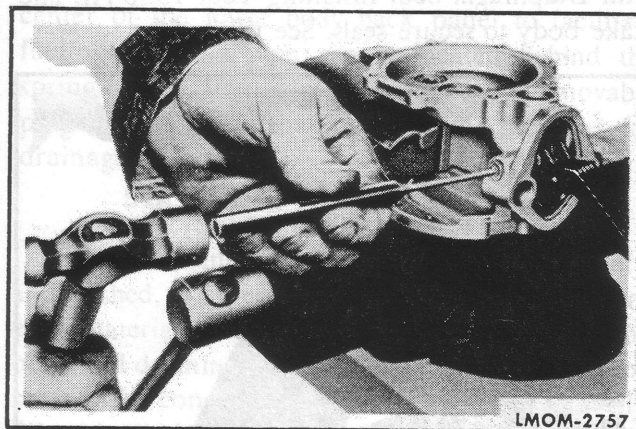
Drive Rocker Arm Pin from the Main Body.
